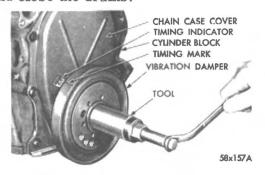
Installing Vibration Damper Assembly Tool C-3688
